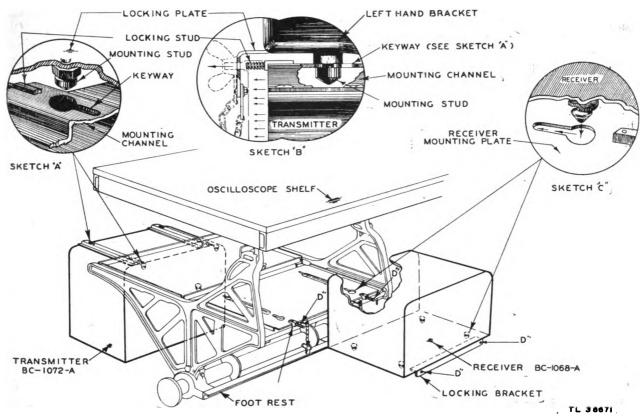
Assembly drawing showing method of mounting transmitter and receiver.
